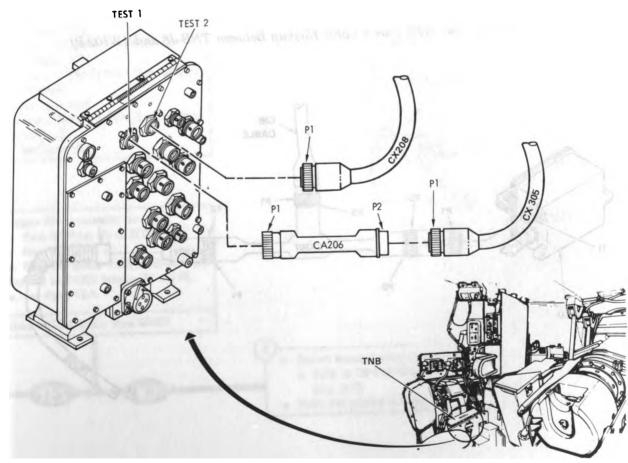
STE Turret Cable Hookup to TNB TEST 1 and TEST 2
